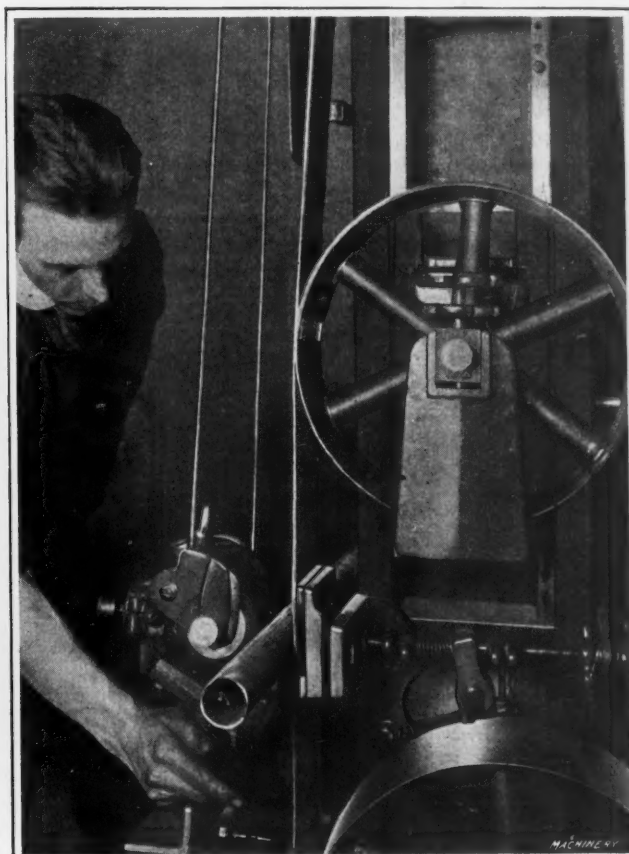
Close View of a Polishing Operation performed on a Machine of the Type shown in Fig. 11
